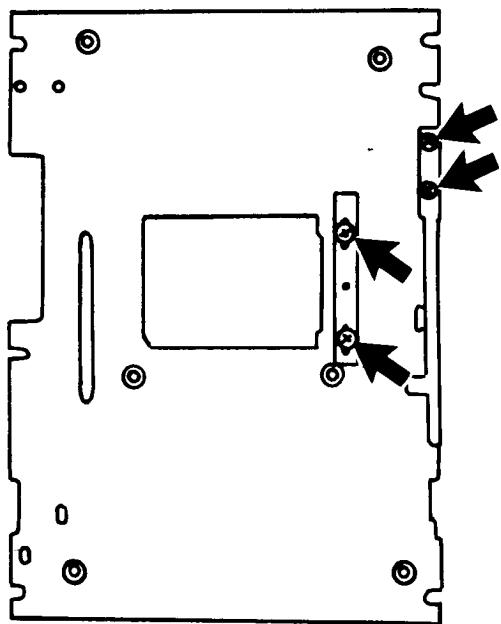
Removing Latch Mechanism and Camera Back Stop Screws
